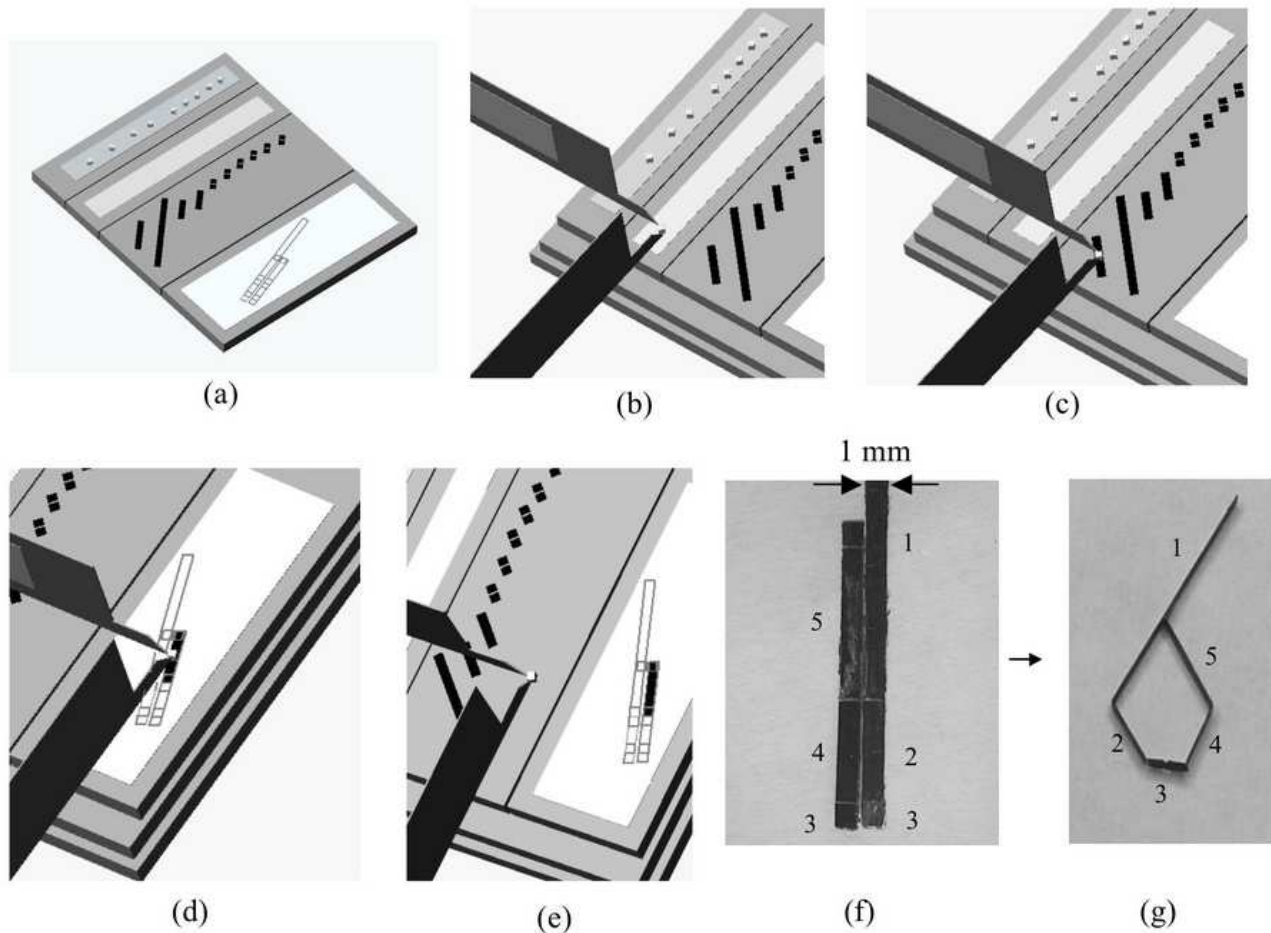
CAD model of the Ortho-tweezers assembling millirobot parts. (a) A pallet is assembled with the needed parts, and placed on a substrate with controllable heaters. (b) The Ortho-tweezers picks up a handling block and dips it in low-melting point wax. (c) The handling block is attached to a part, for example a link. (d) The handling block and part combination is reoriented and the part is put in place, in this example, for a 5 bar linkage. (e) The handling block is returned to the pallet. (f) Assembled five-bar (unfolded). (g) Assembled five-bar linkage, after folding.
